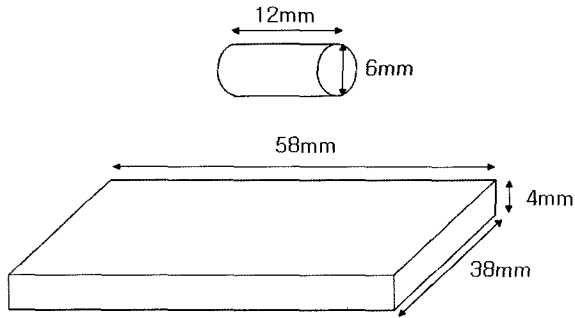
Dimensions of plate type counterpart specimen and pin type wear test specimen for wear test.
